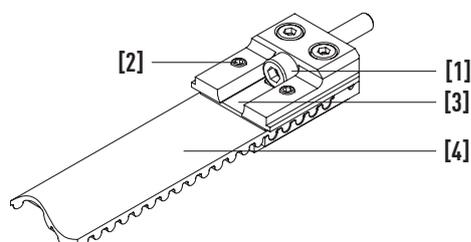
Installing the toothed belt in the belt tightener (HT100B)
